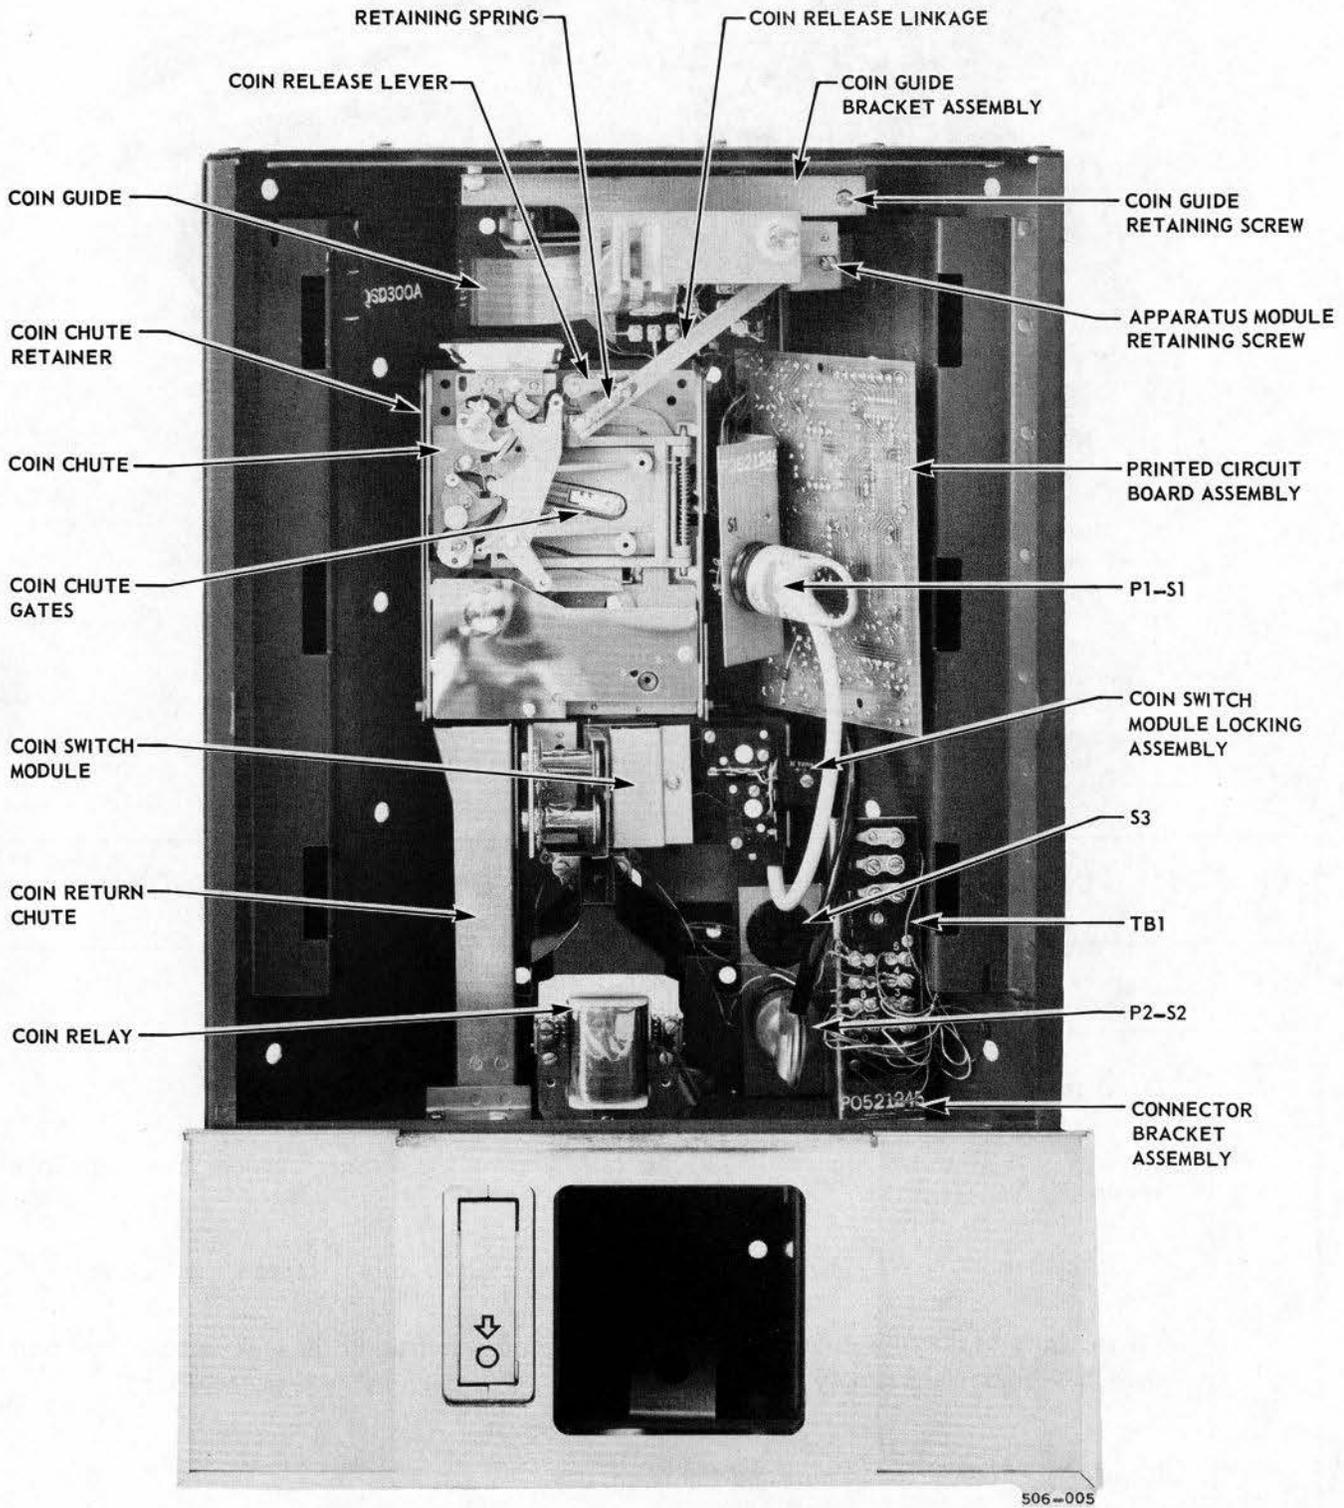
QSD300A and QSD2300A Coin Telephone Set with Door Assembly Removed
